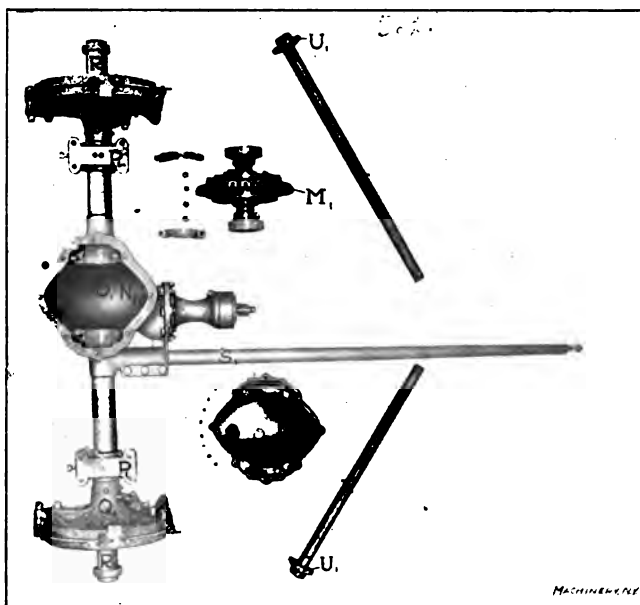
The Full Floating Type Rear Axle, Differential Gearing, etc.
